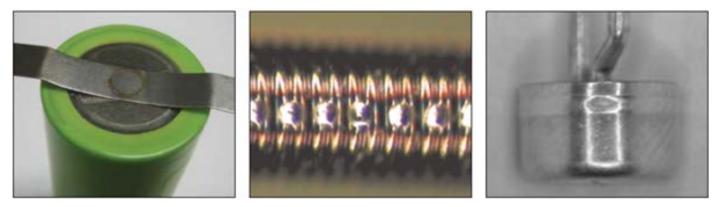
CW fiber laser applications. Left: high speed welding of copper tabs to steel battery cans, middle: coil welding with sub 100 micro spot welds, right: welding airbag detonators.
